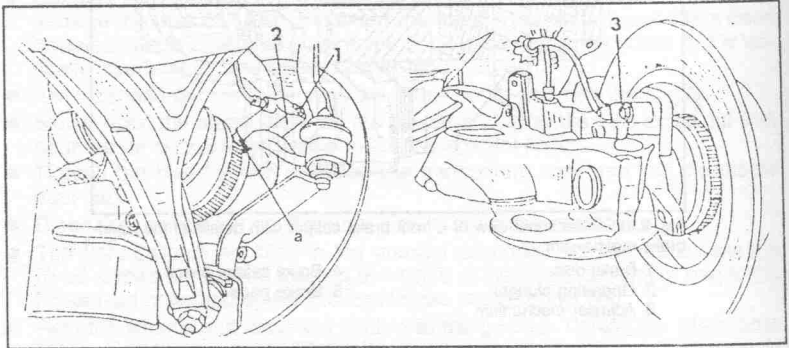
The location of the wheel speed sensors on front axle (left) and rear axle (right).
